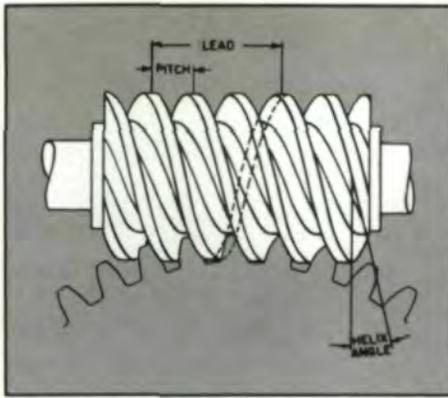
Worm gear terms. (Courtesy Mobil Oil Corporation.)
